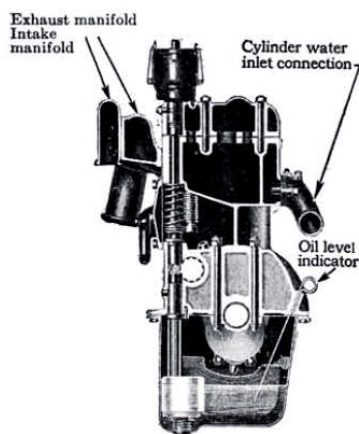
Sectional end view of engine showing how the oil pump (also distributor) is driven by a gear on the camshaft. The oil level indicator is also shown.
